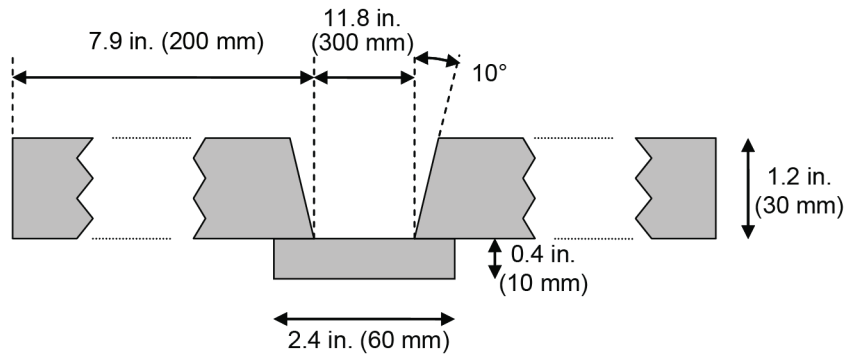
Geometry of the Weld Joint To Be Used for the Screening Test Coupon
